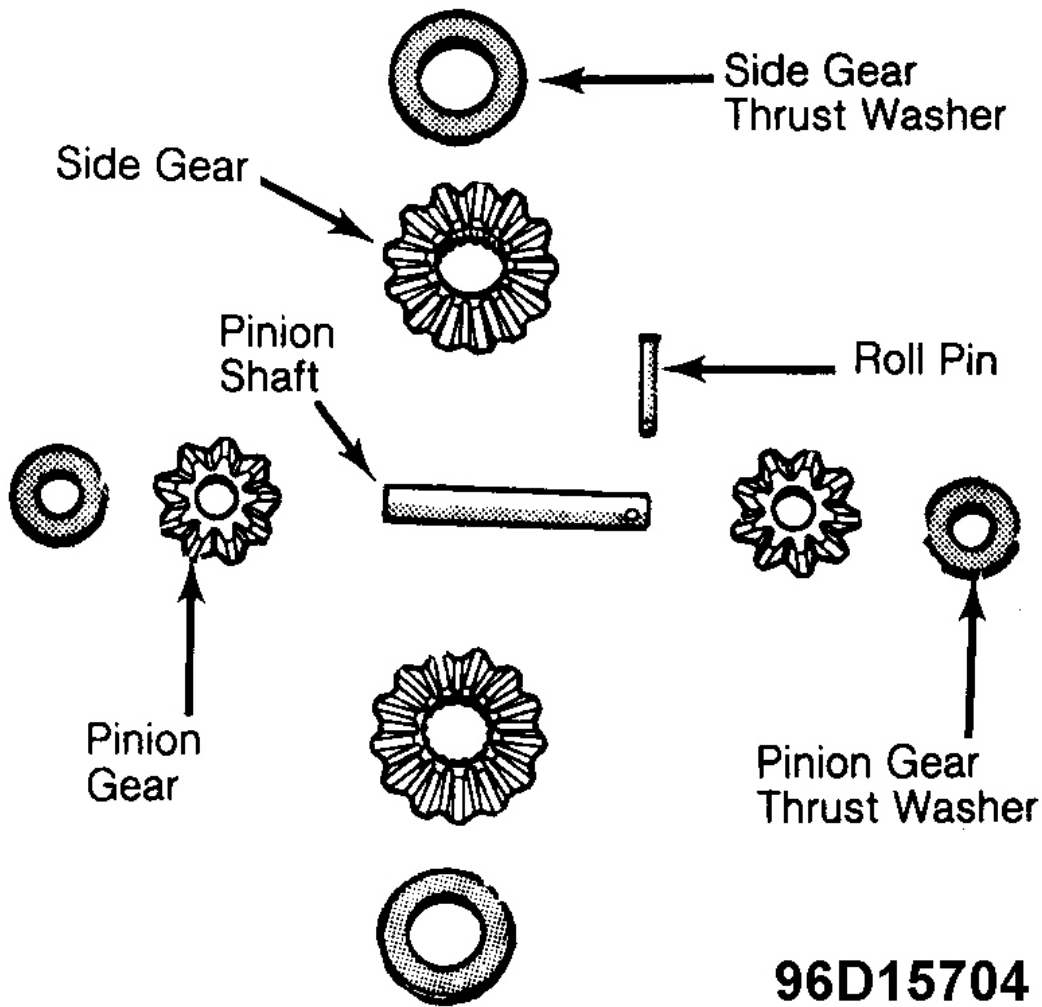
View of Differential Gears, Thrust Washers & Pinion Shaft
